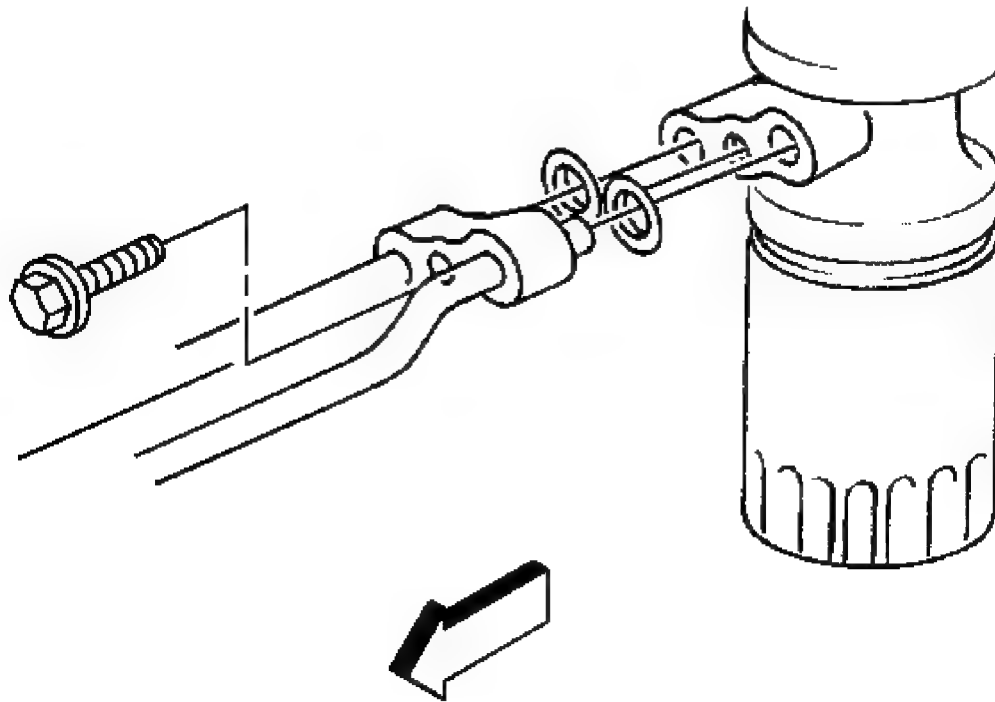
Locating Engine Oil Cooler Pipe Bolt
